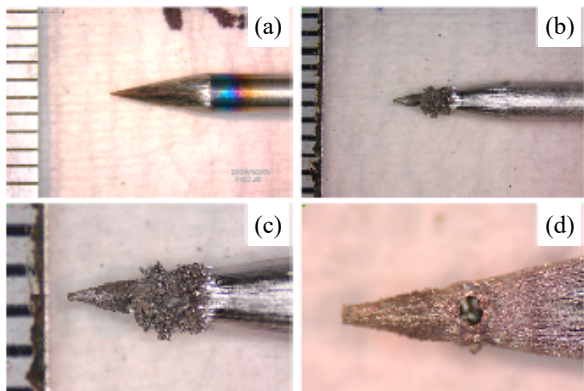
Appearance of Tungsten Electrode, (a) Tungsten electrode as grinded before welding (b) Tungsten electrode after automatic TIG welding (c) Magnification of (b) (d) Tungsten electrode of (c) after polishing
